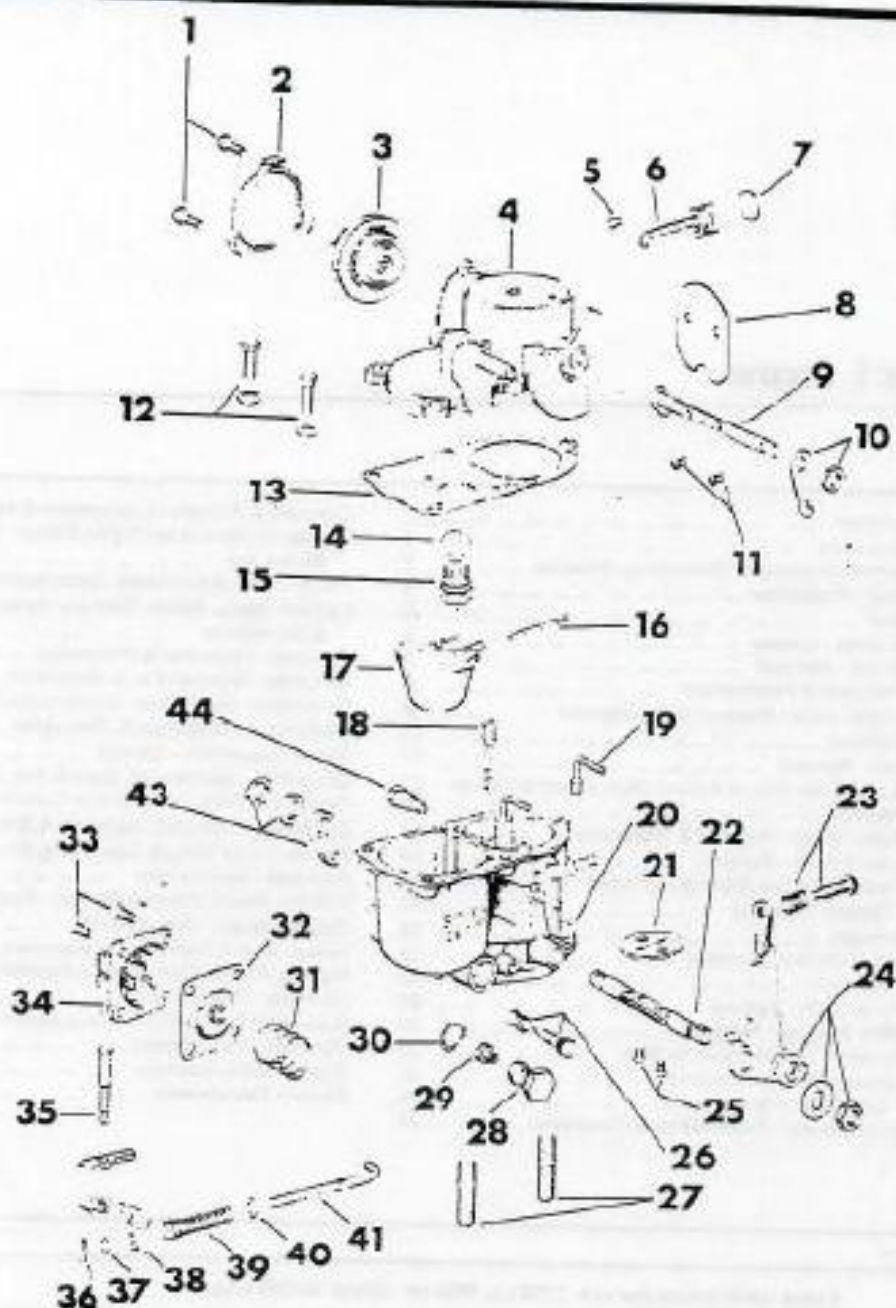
SOLEX 28 HCT CARBURETTOR - EXPLODED VIEW
